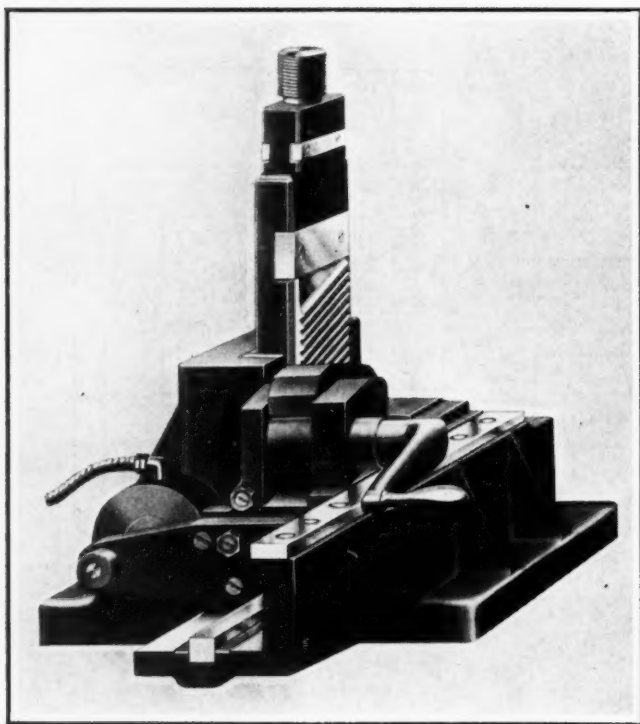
Fixture Provided with a Shuttle for Sliding the Work into and out of the Broaching Position
